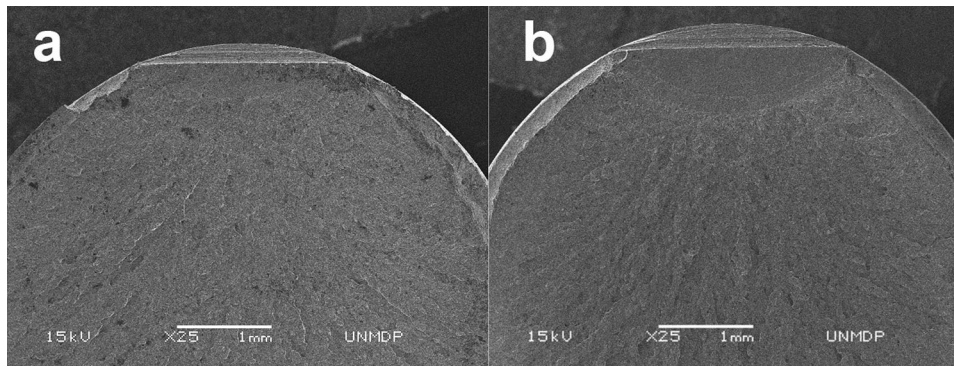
Fracture surfaces of notched tensile specimens
